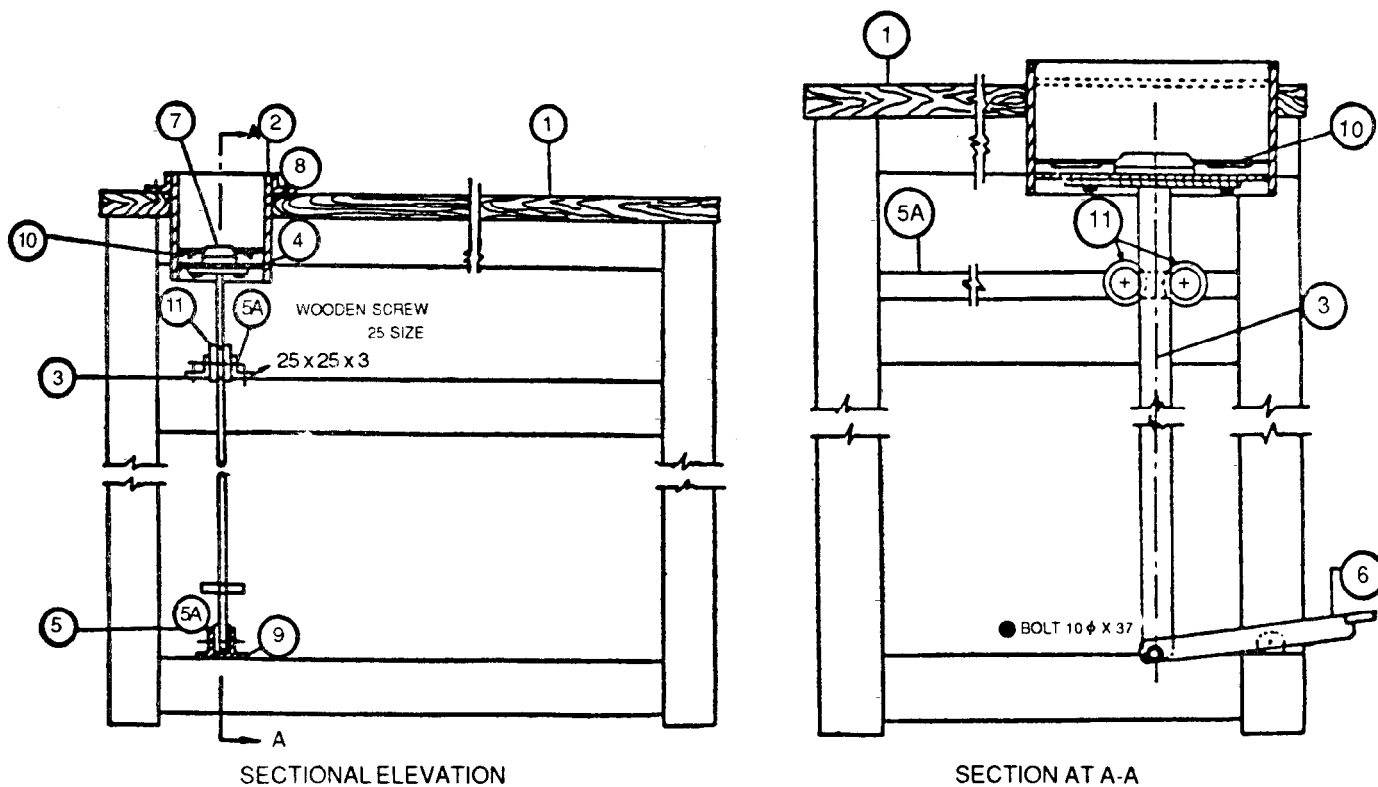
IMPROVED BRICK MOULDING TABLE (ASSEMBLY DRAWING) — Contd
